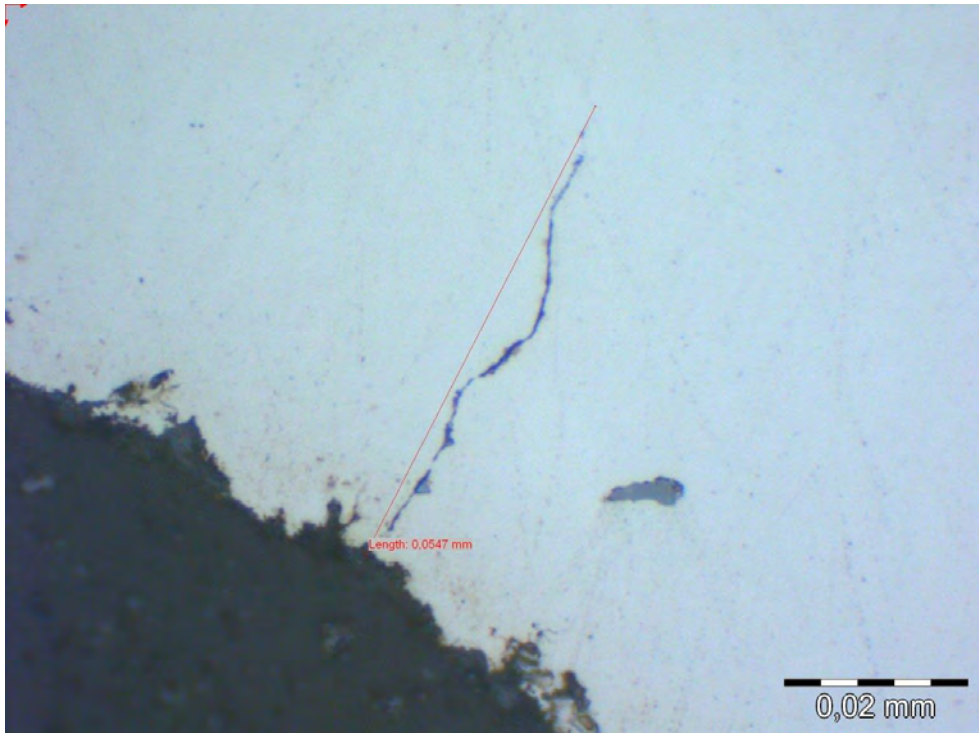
Cut two in crack at segment B, fourth ridge on barrel no. SFK 0120-A
